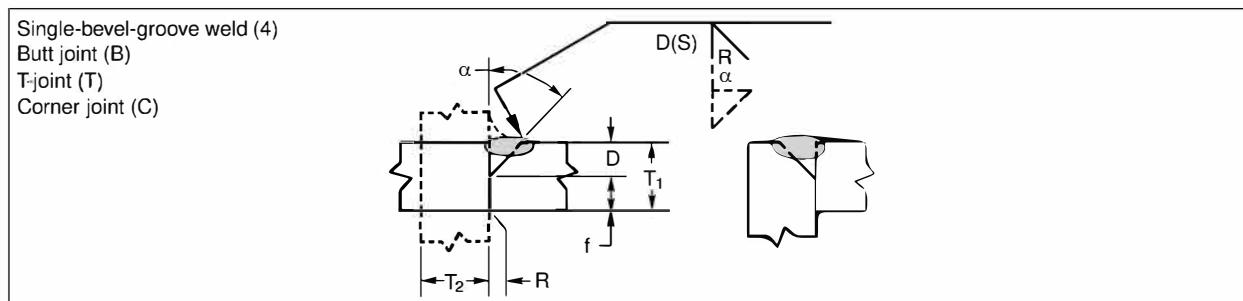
Prequalified PJP Groove Weld Joint Details (see 5.4.2) (Dimensions in Inches)
